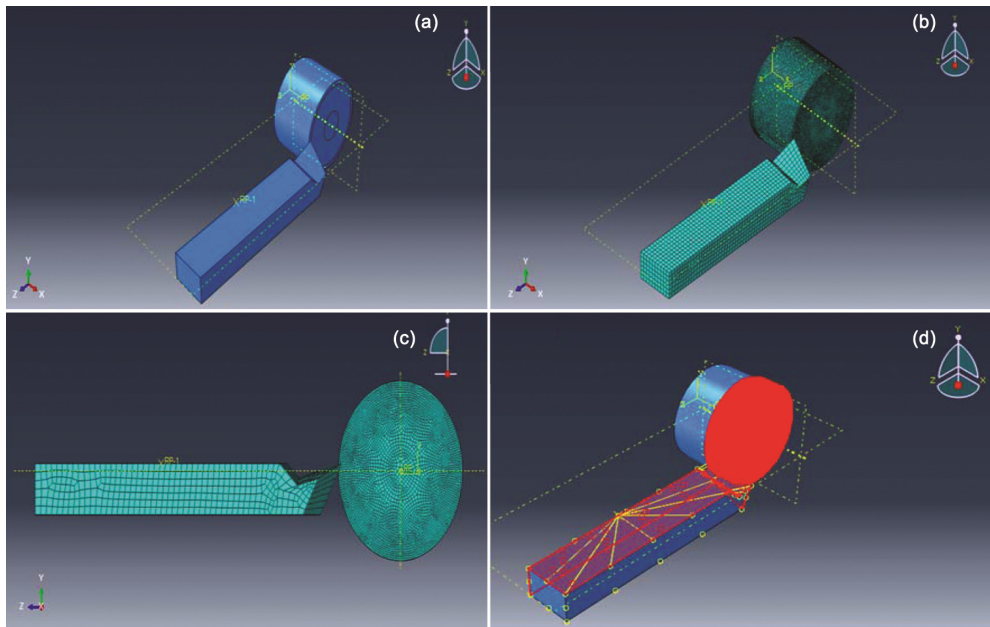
(a) Assembly, (b) Meshing top view, (c) Meshing front view and (d) Surface to surface contact.
